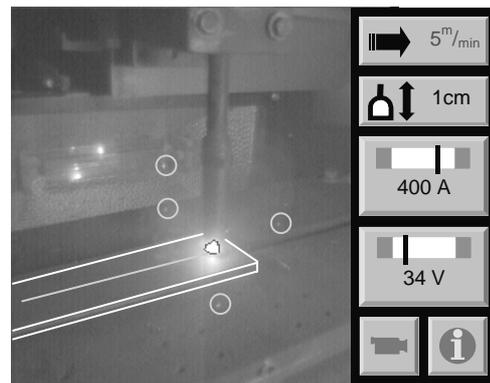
Possible insertions: work piece geometry, welding seam, splashes, wire feed, height of the arc, welding current and welding voltage
